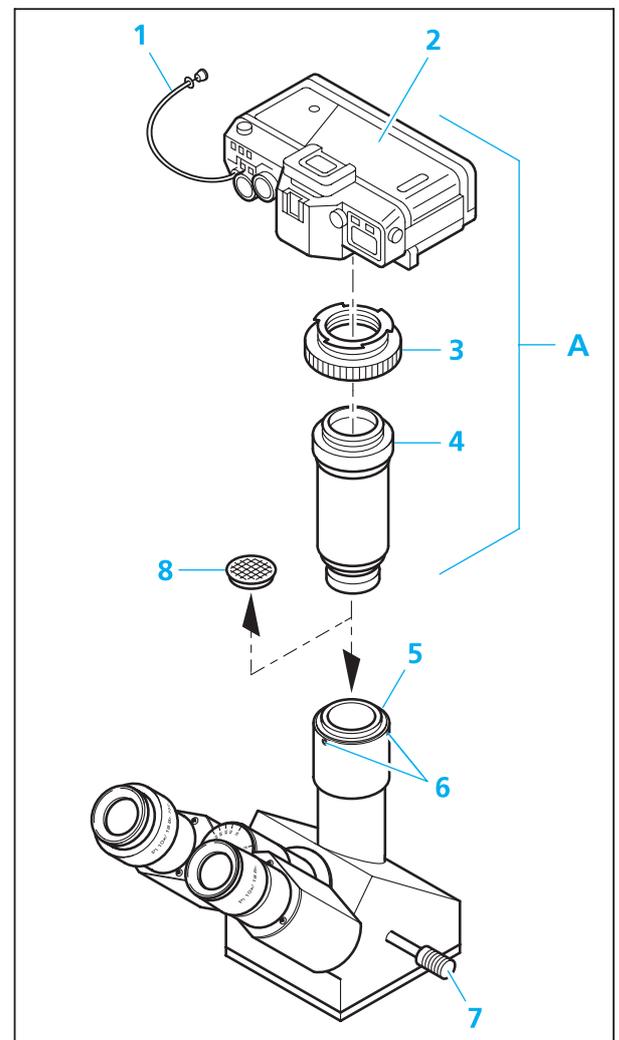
Attachment of SLR camera, e.g. CONTAX 167 MT
